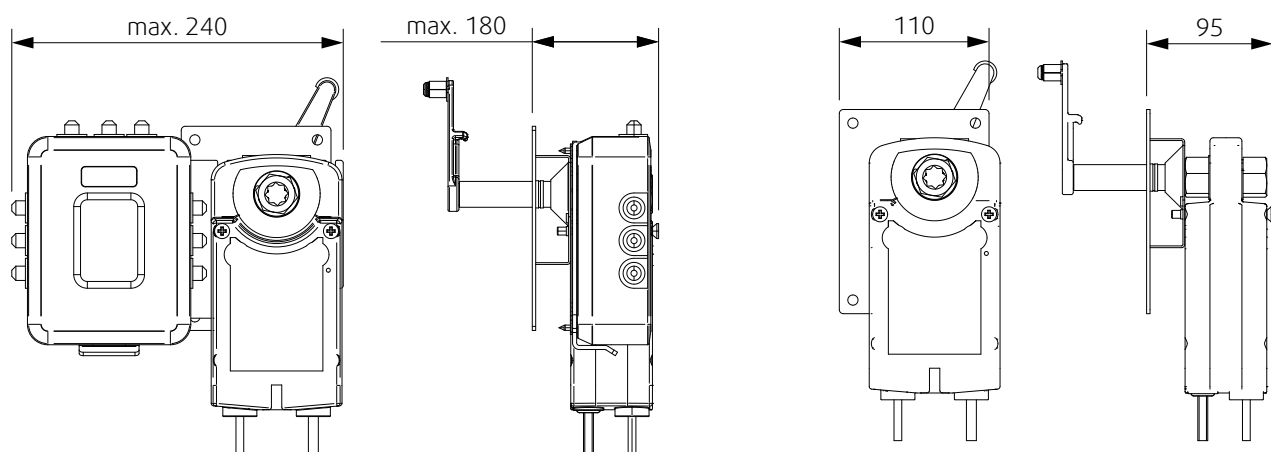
Dimensions of the Gruner actuator mechanism with (left) and without (right) communication unit
